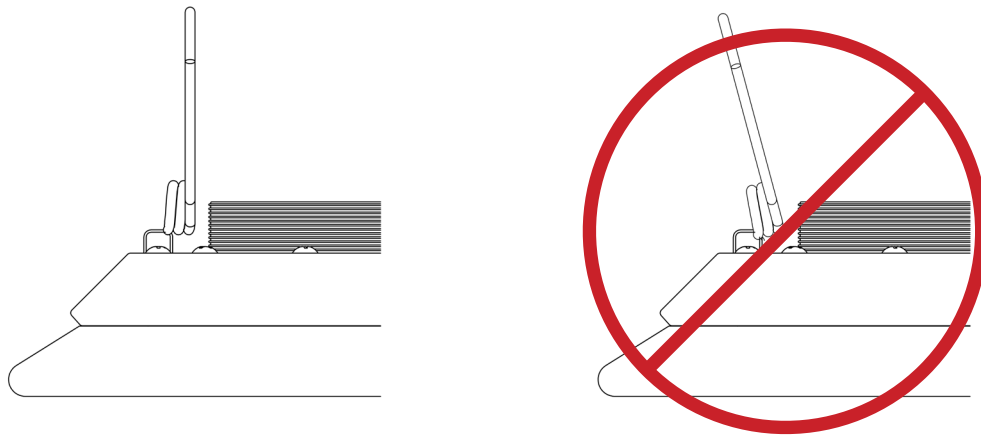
ISO VIEW OF INSTALLED TORSION SPRING
